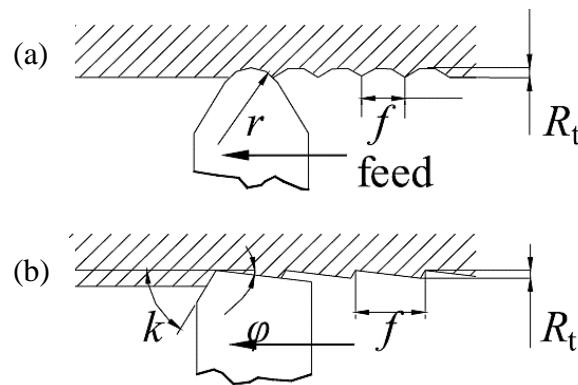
Schematic illustrations of tool geometry on surface roughness when turning with (a) tool with a nose radius, and (b) sharp-nosed tool [30].
